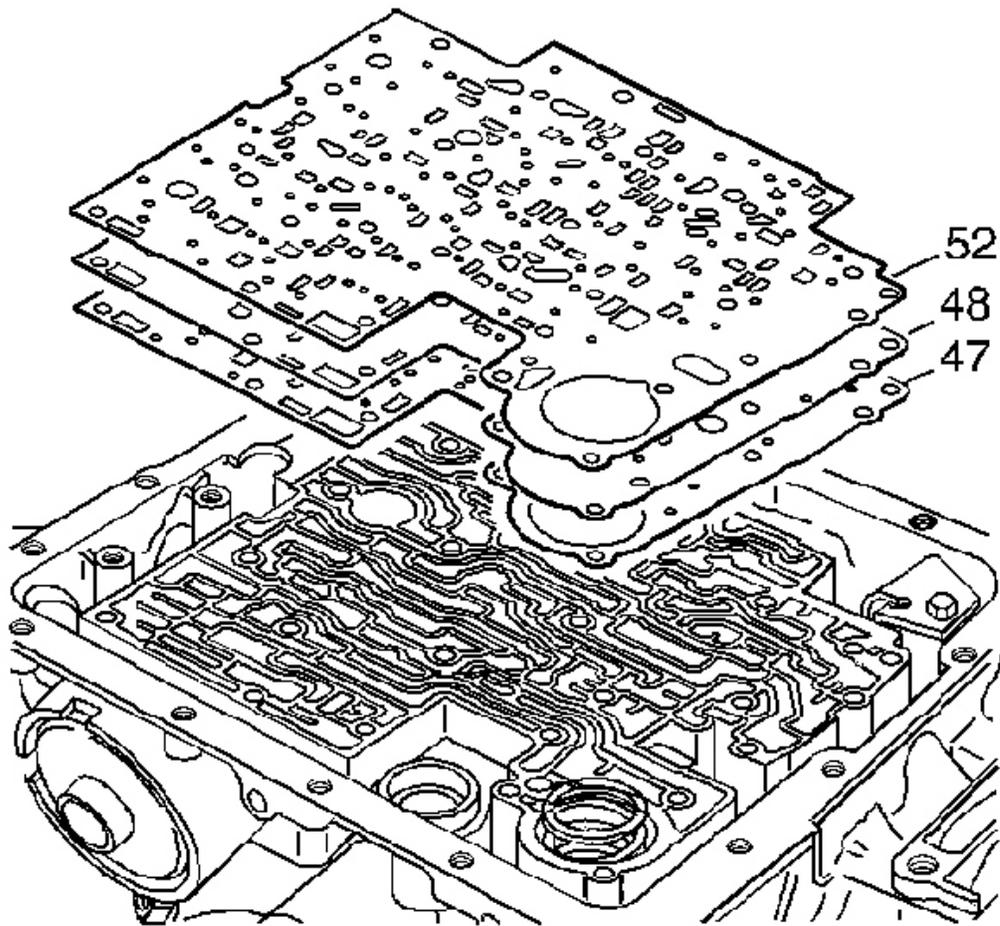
Valve Body Gasket, Valve Body Spacer Plate & Case Gasket
